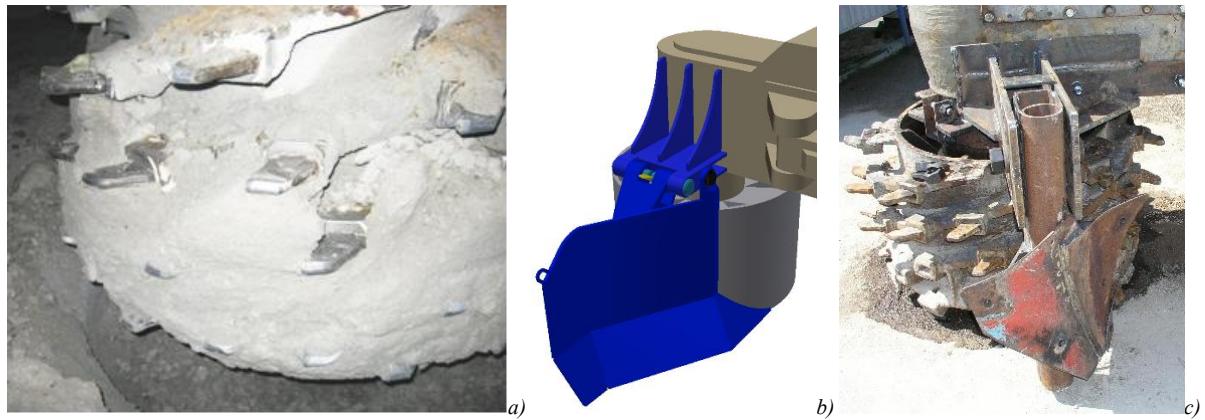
Cutting head of the KDS-2 machine (Krauze et al., 2010):
